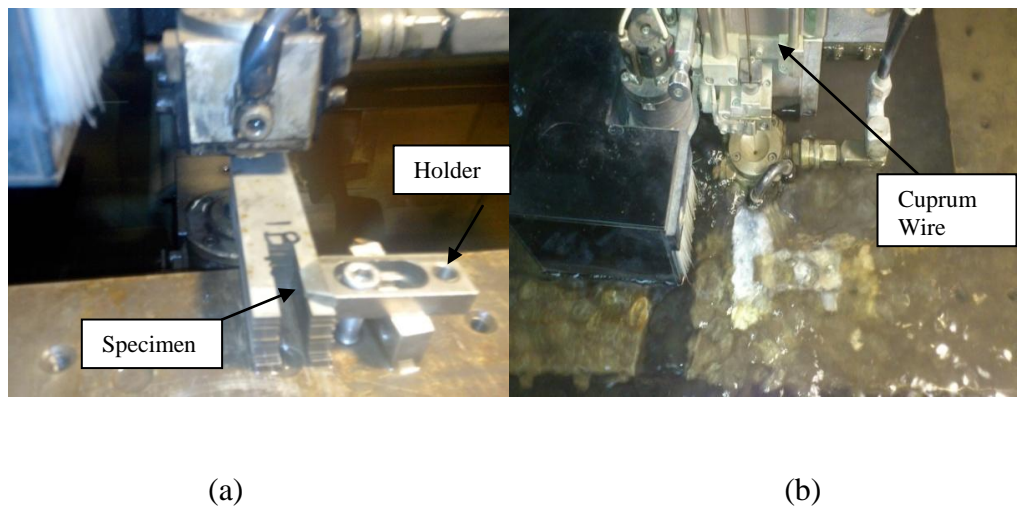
Preparation of Specimen by using EDM machine. (a) specimen being clamped and (b) cutting process
